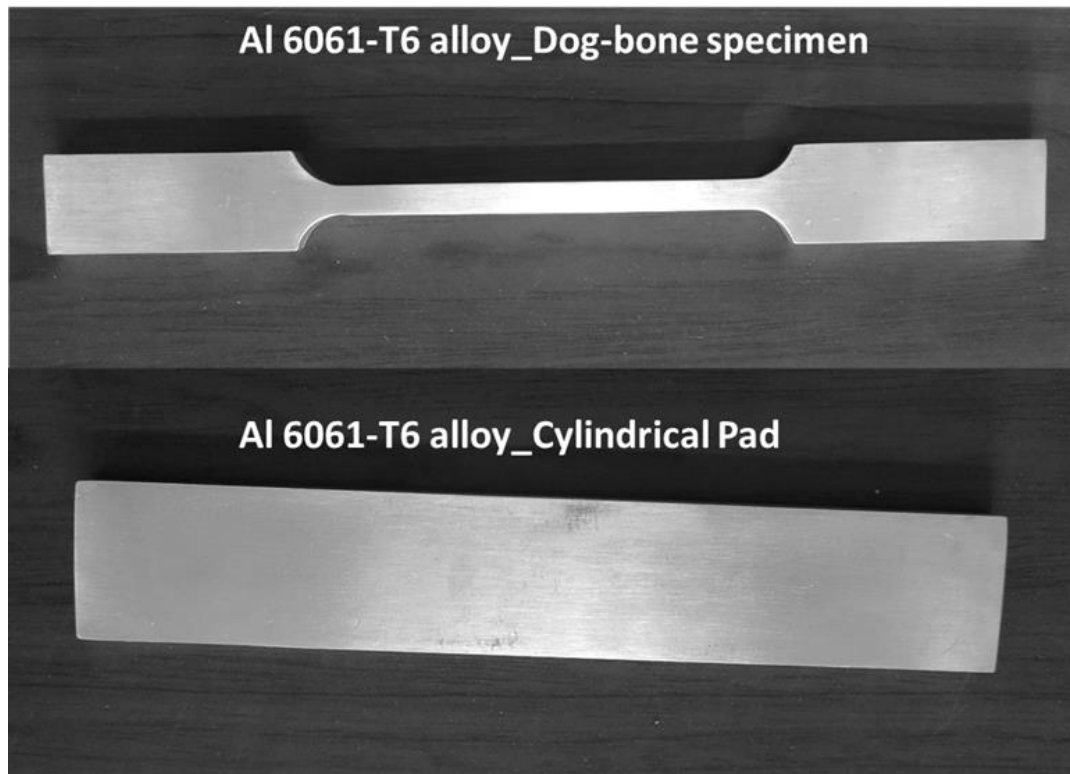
Fabricated Dog-bone specimen and cylindrical pad
